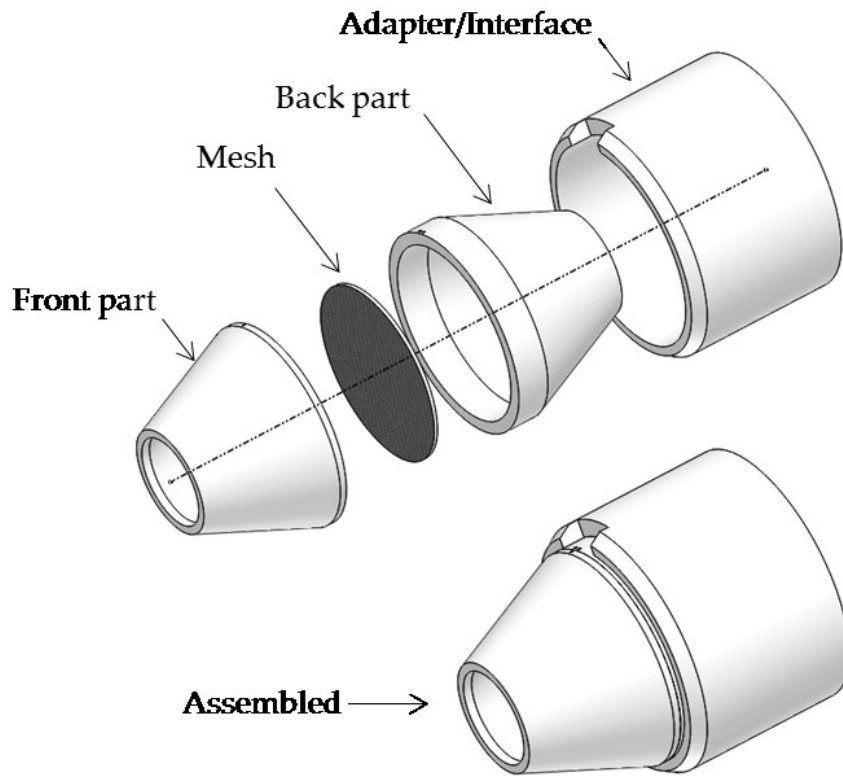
Custom made pneumotach module 3D model, isometric view, exploded and assembled.
